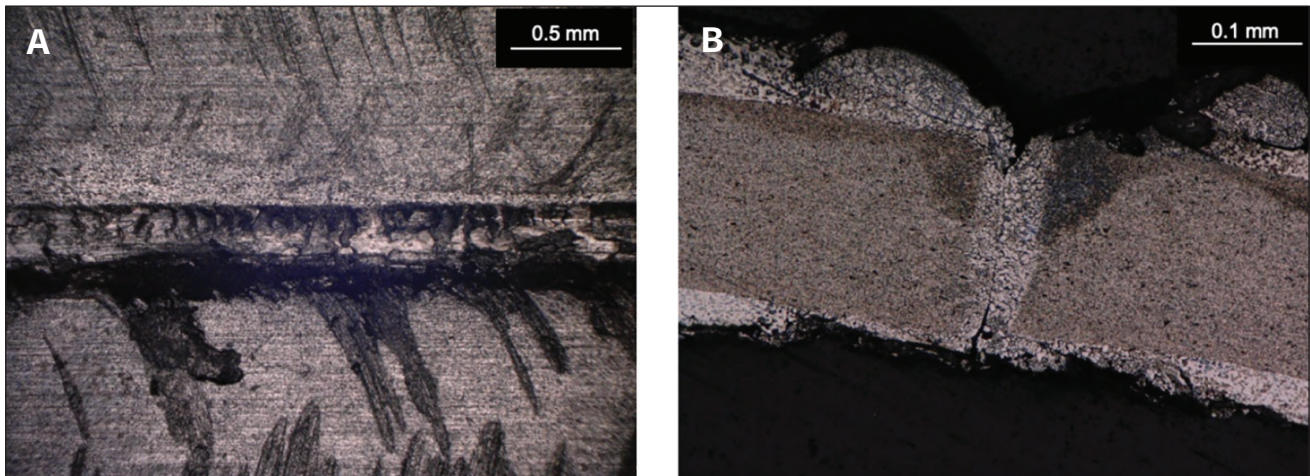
Specimens of an overheated weld. A – Top view; B – cross-sectional view of the joint's cross section.
